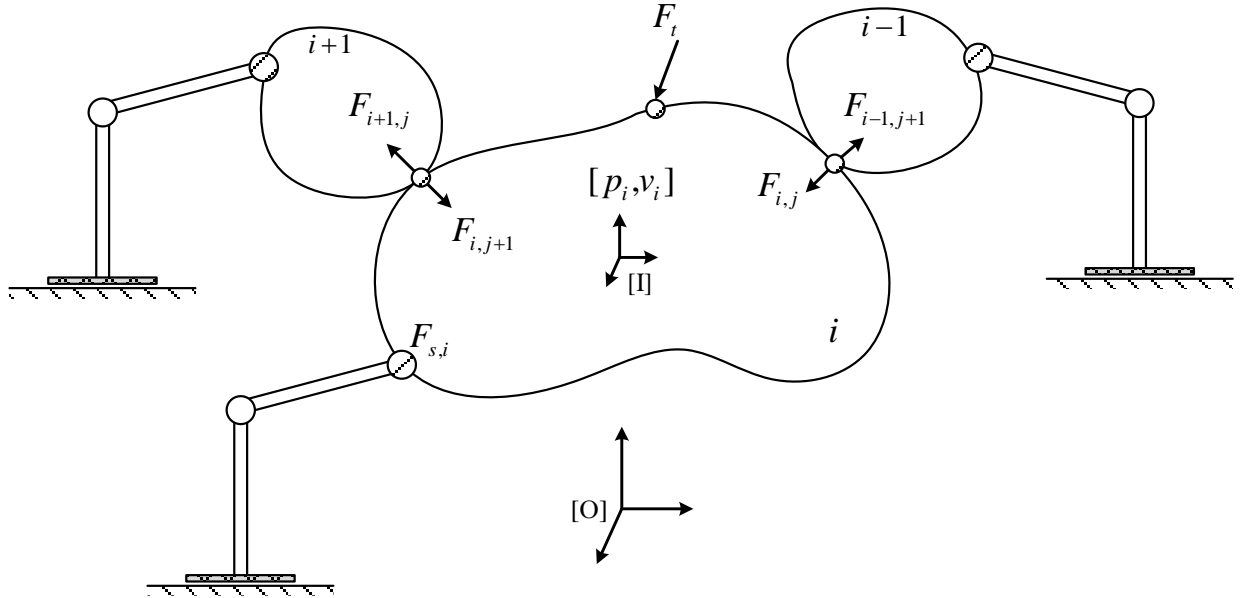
Model of an assembly of workpieces manipulated by active fixtures.
